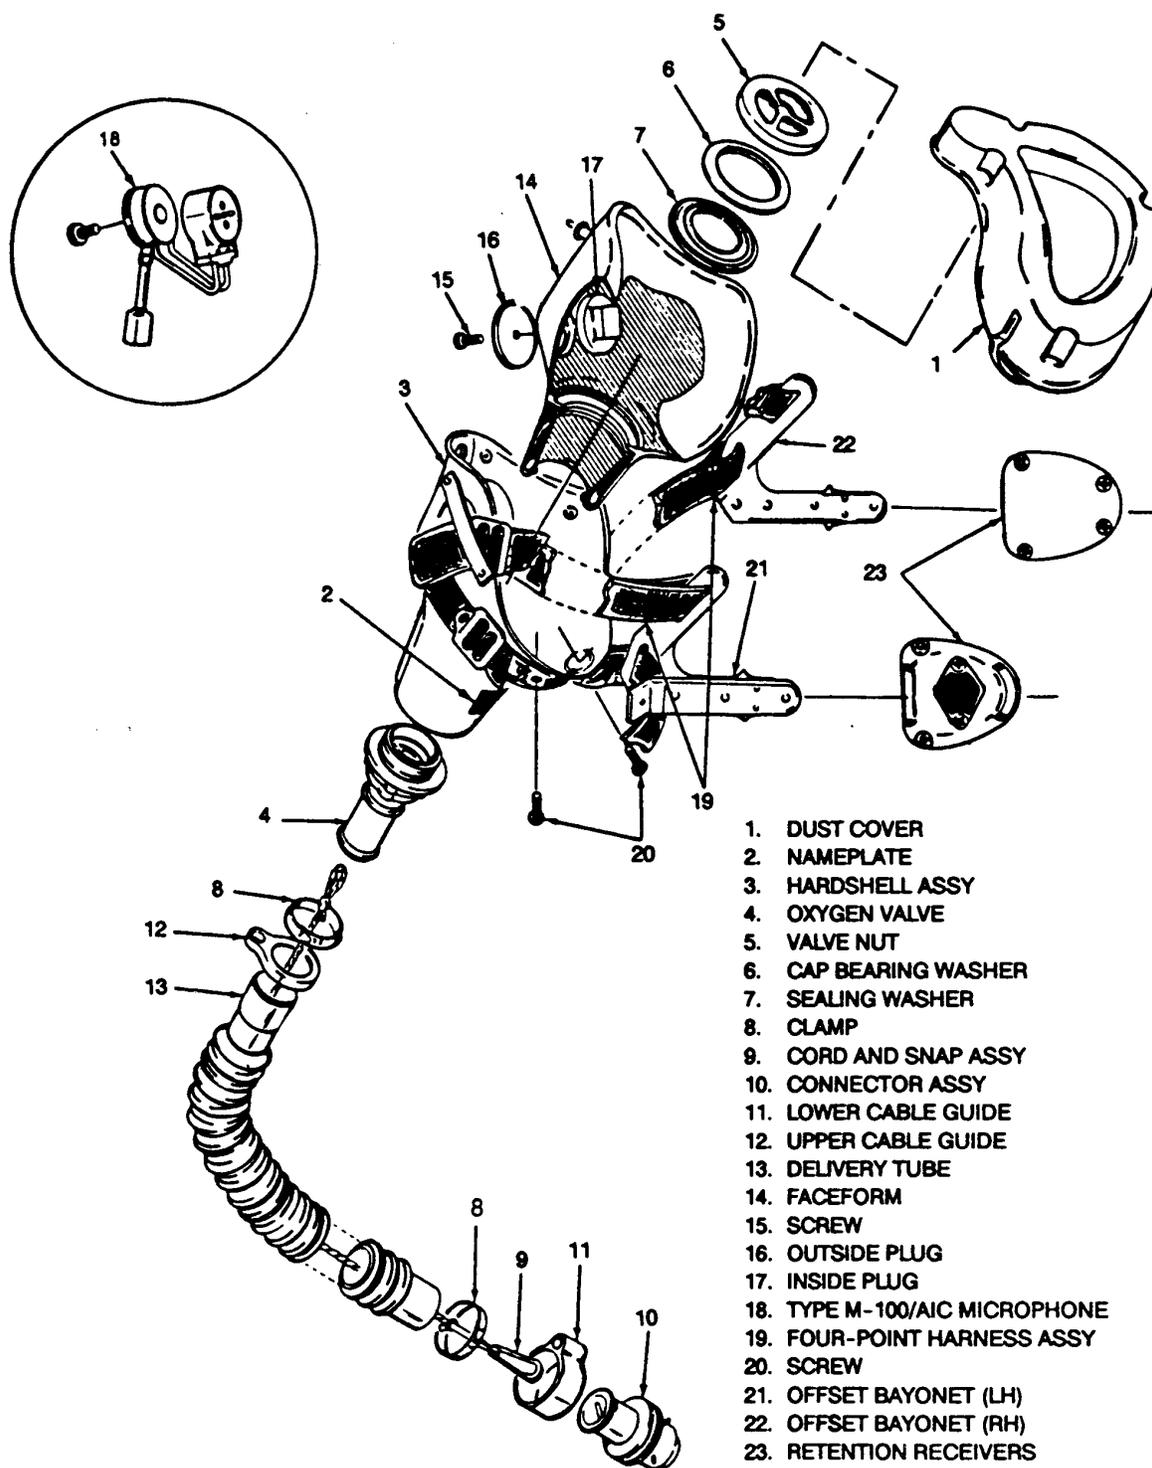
Type MBU-5/P oxygen mask assembly.
